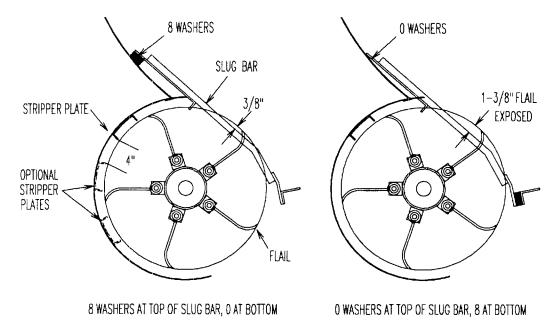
, SLUG BAR AND STRIPPER PLATE ADJUSTMENTS
